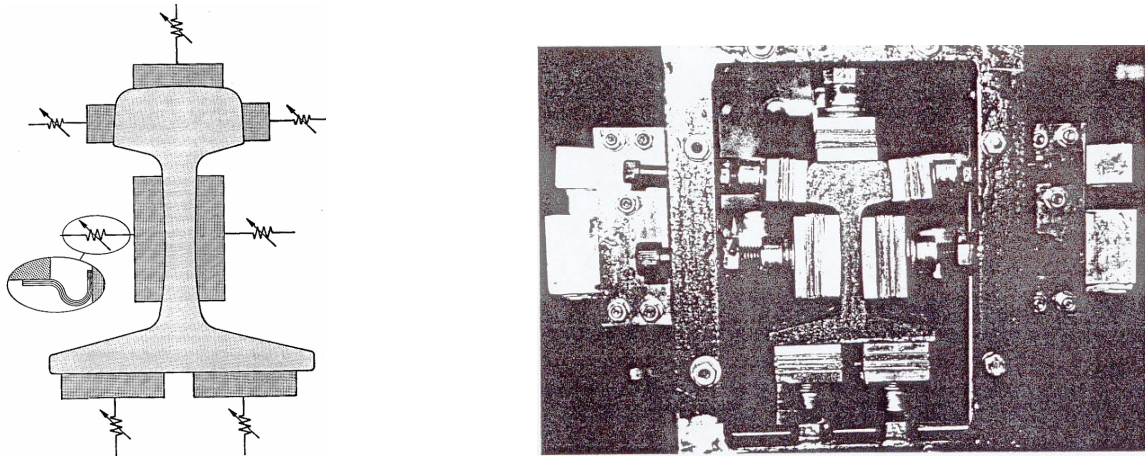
Electrical contact arrangement for rail welding at UT-CEM
